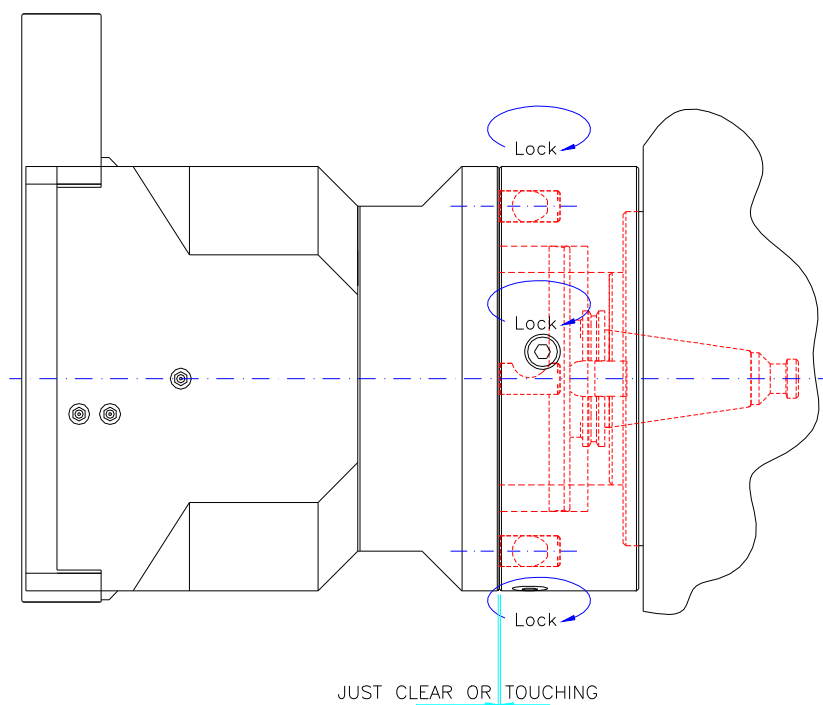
Locating and clamping the ZX 420 onto the machine
